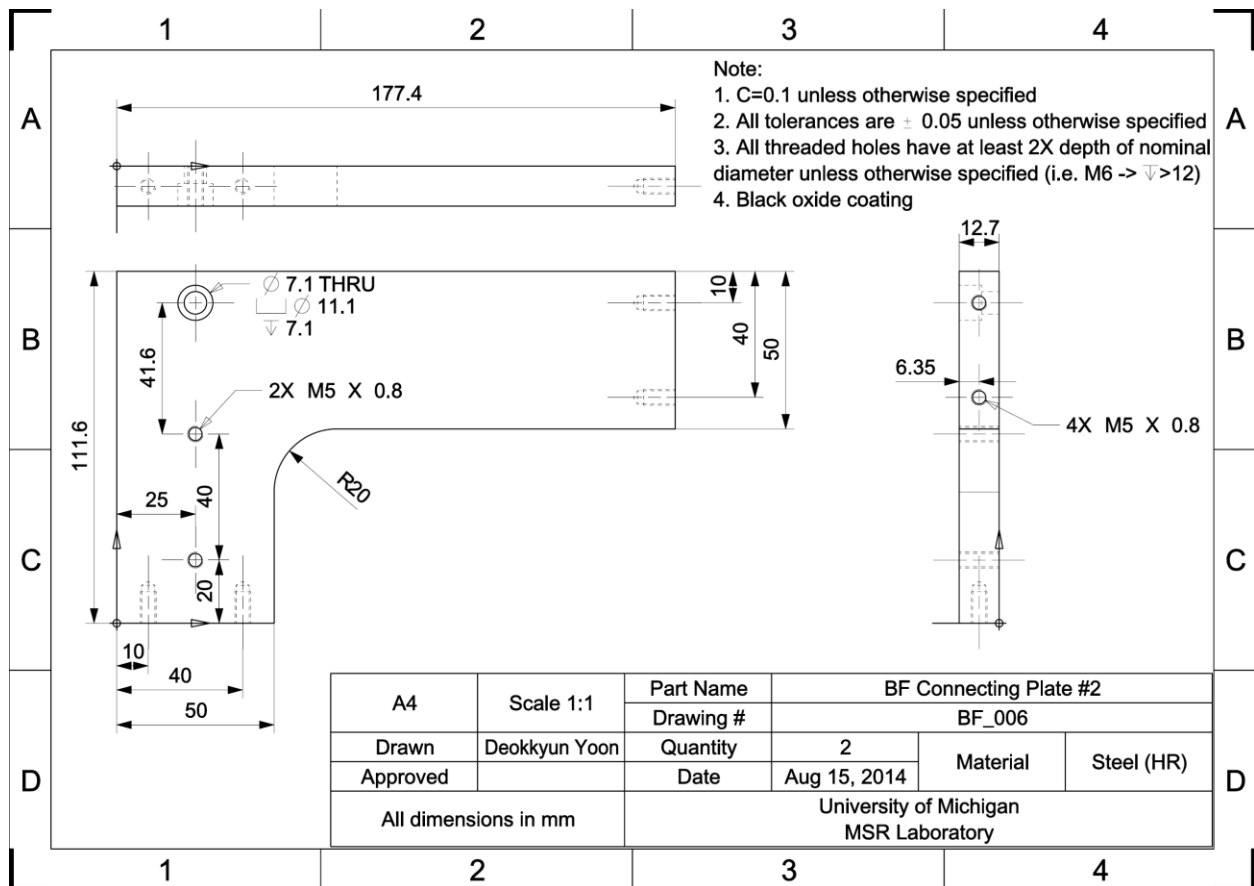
Manufacturing drawing of Base Frame Connecting Plate #2.
